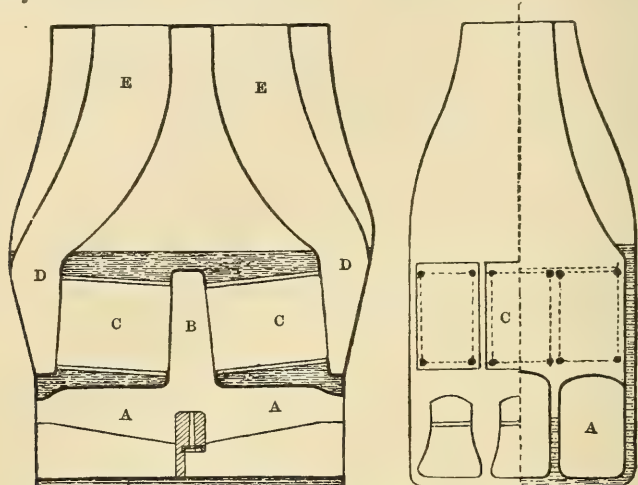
Double Boilers. Longitudinal Section and Front Elevation.
